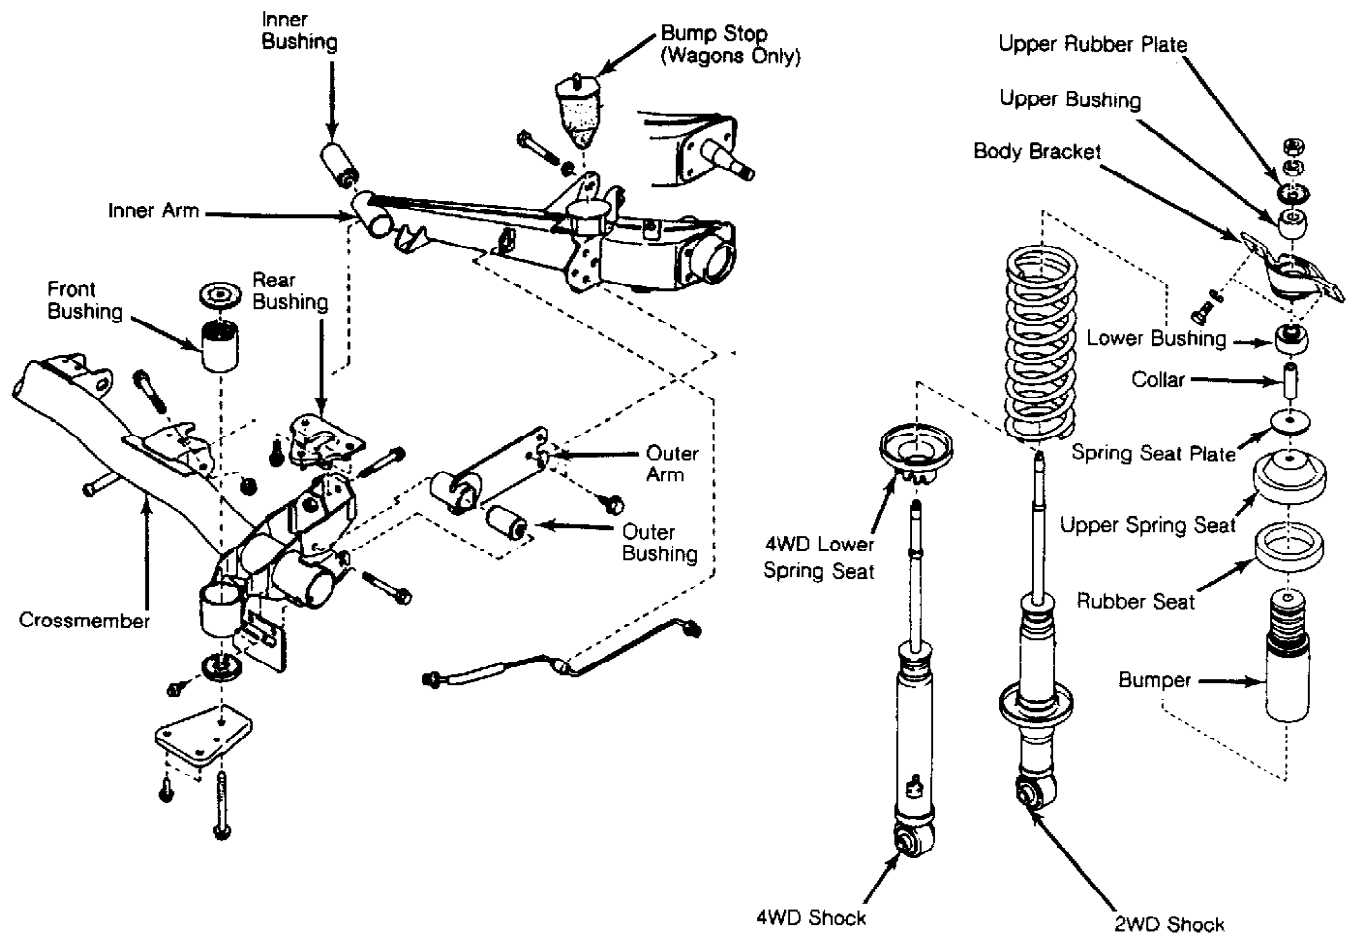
Exploded View Of Rear Suspension & Strut Assembly (Loyale)
